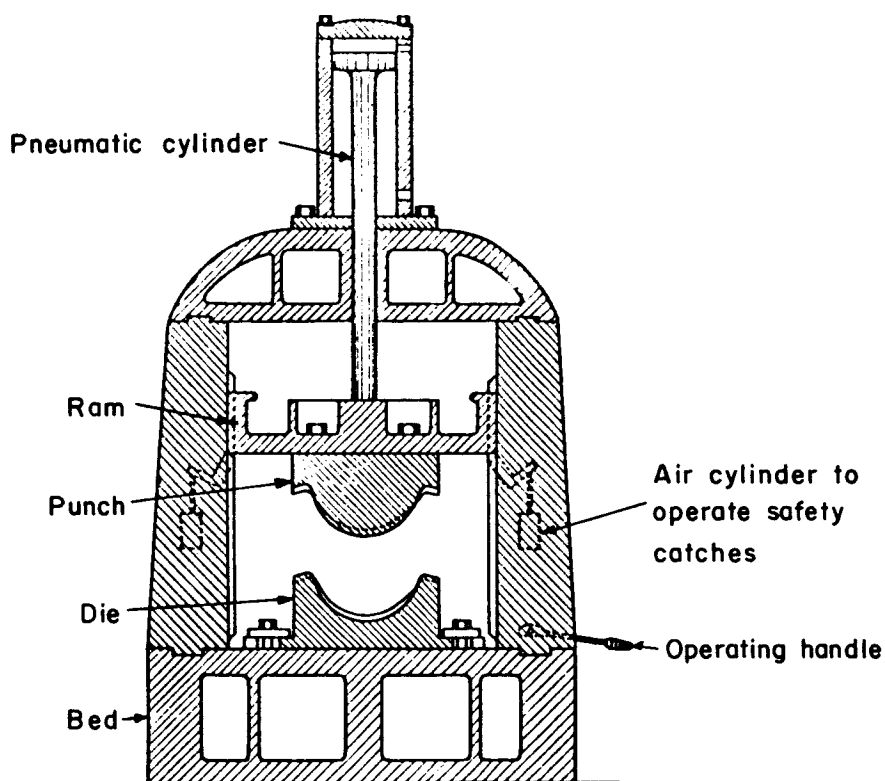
PNEUMATIC HAMMER (REF. 95)
